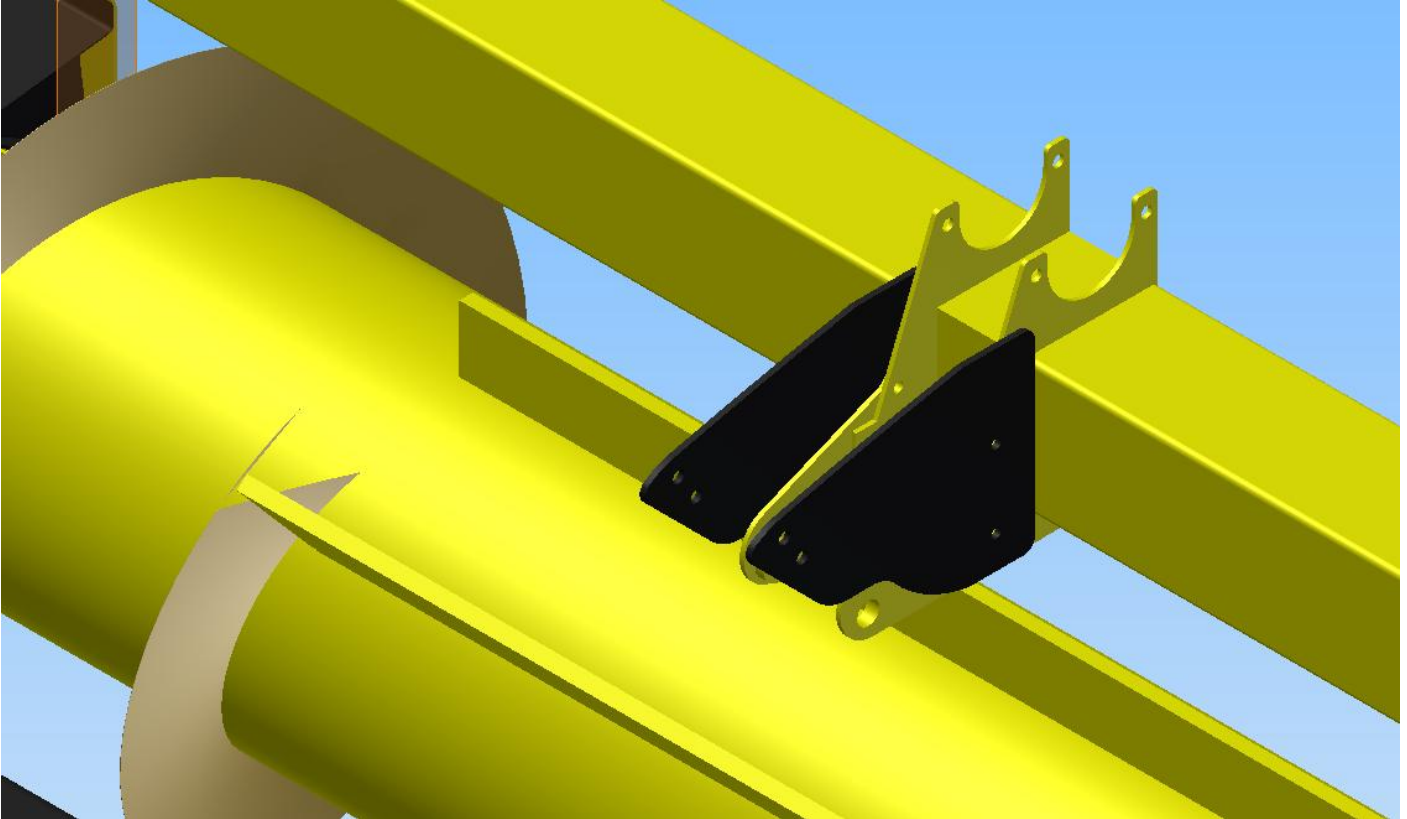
CENTER MOUNT BOLTED IN PLACE 406631
